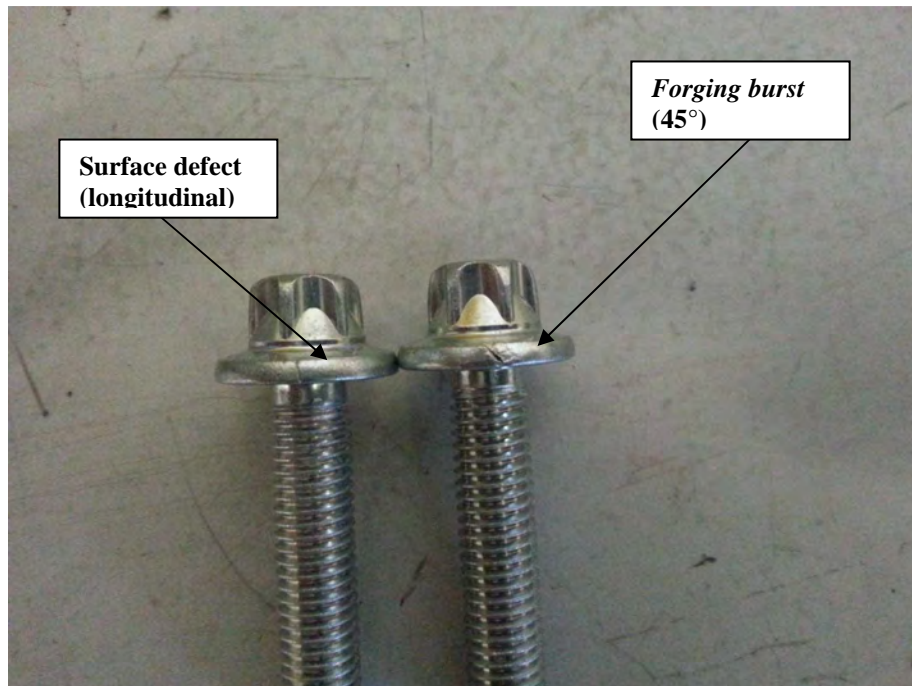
Surface defect and *forging burst* on M8 screws.
